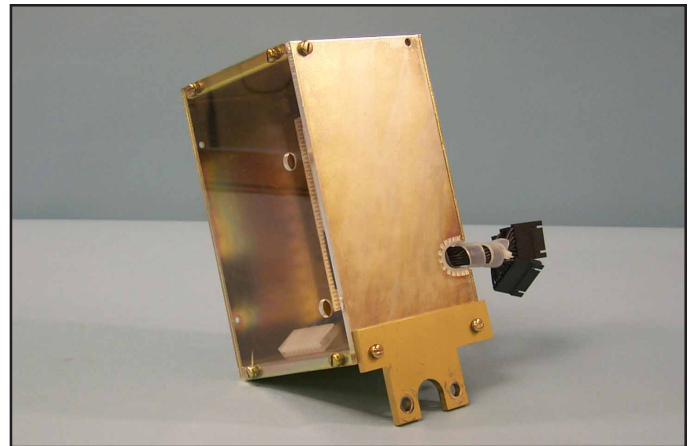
Trip Unit Mounting Bracket Installed on the Minibox.
